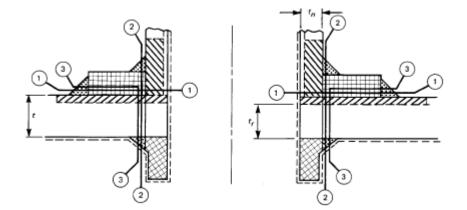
Nozzle Attachment Weld Strength Paths and Weld Loads[11]
